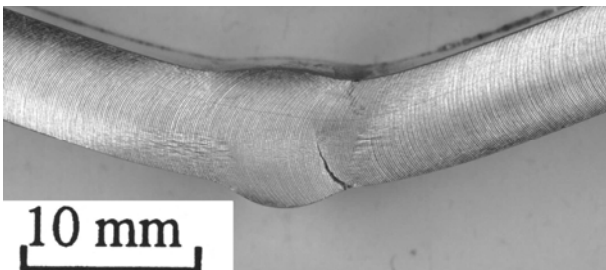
Bending Test of AA 2219 TIG Weld
